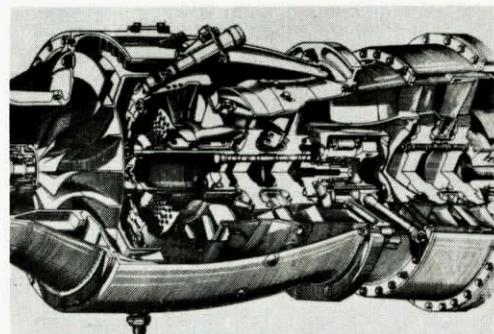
Radial-Axial Combustion Chamber with rotating Injection (System TURBOMECA)
